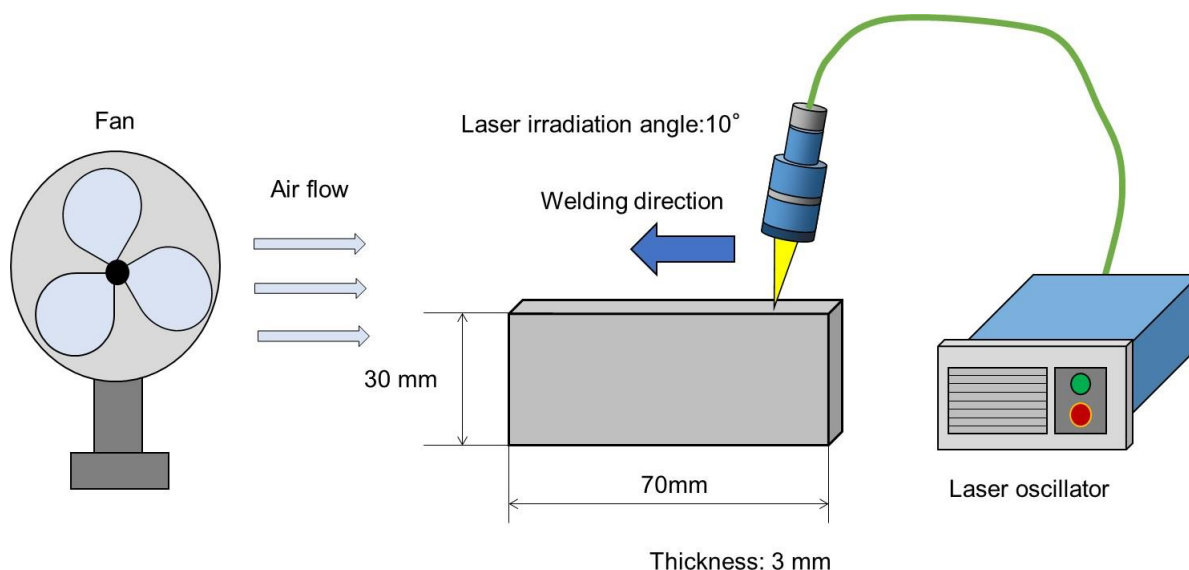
Laser welding configuration for bead on plate welding.
